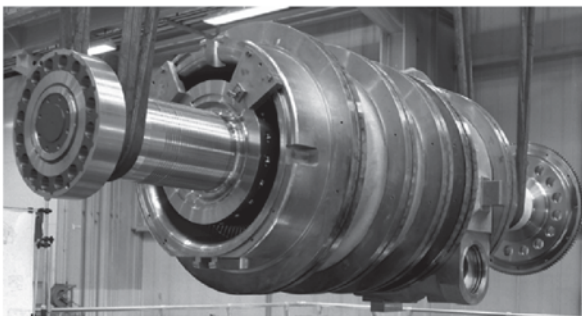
Inner casing of a HP part with *countersunk bolts* and outer casing of *barrel type*. (Courtesy Siemens Energy)
